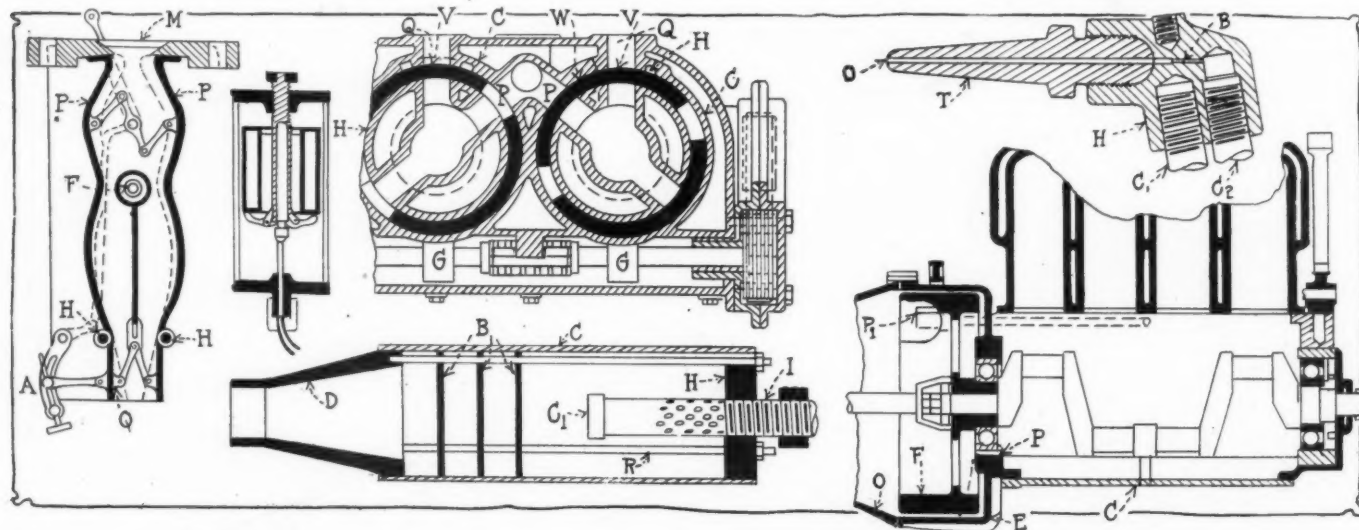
Roth carbureter. Fig. 2—Belden rotary valve. Fig. 3—Sames muffler. Fig. 4—Buckham welding torch. Fig. 5—Coffin oiling system
